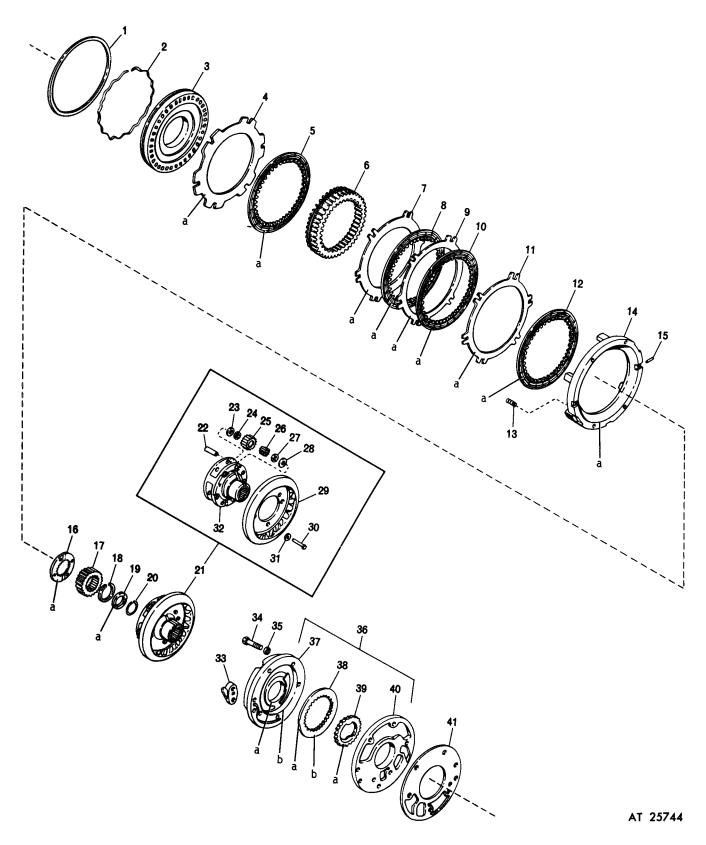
Reverse-range clutch and planetary, and rear oil pump—exploded view.
